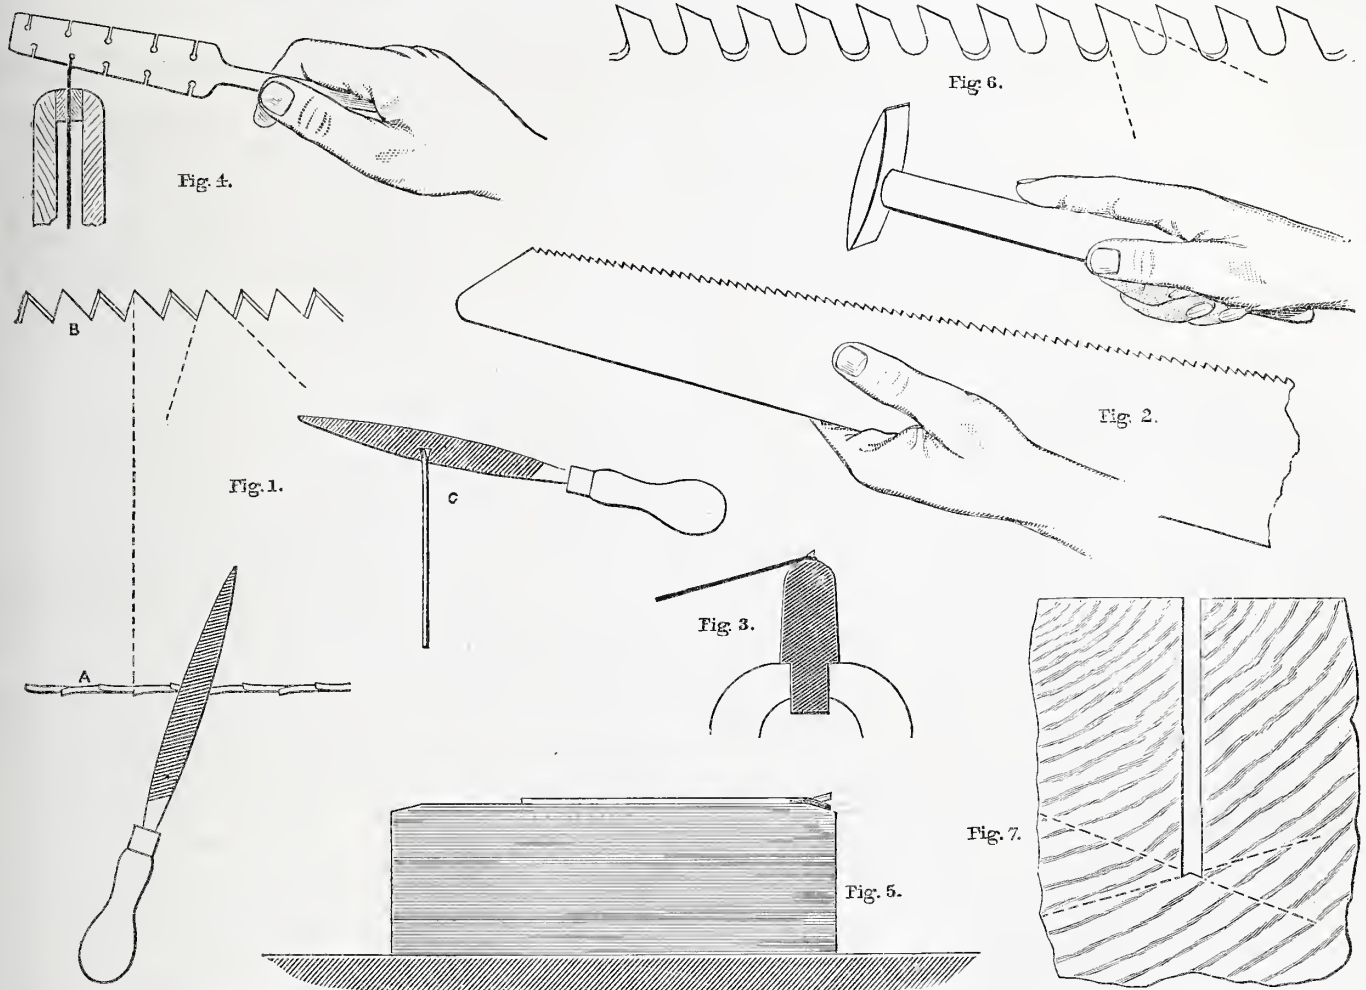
Hand-saw Teeth. Fig. 2.—Method of Setting on a Block. Fig. 3.—Section of Setting Block. Fig. 4.—Method of Using Piler Set. Fig. 5.—Method of Setting by Chamfered Edge. Fig. 6.—Teeth with much "Rake," used for Cutting Soft Woods. Fig. 7.—Saw Kerf, Enlarged.
